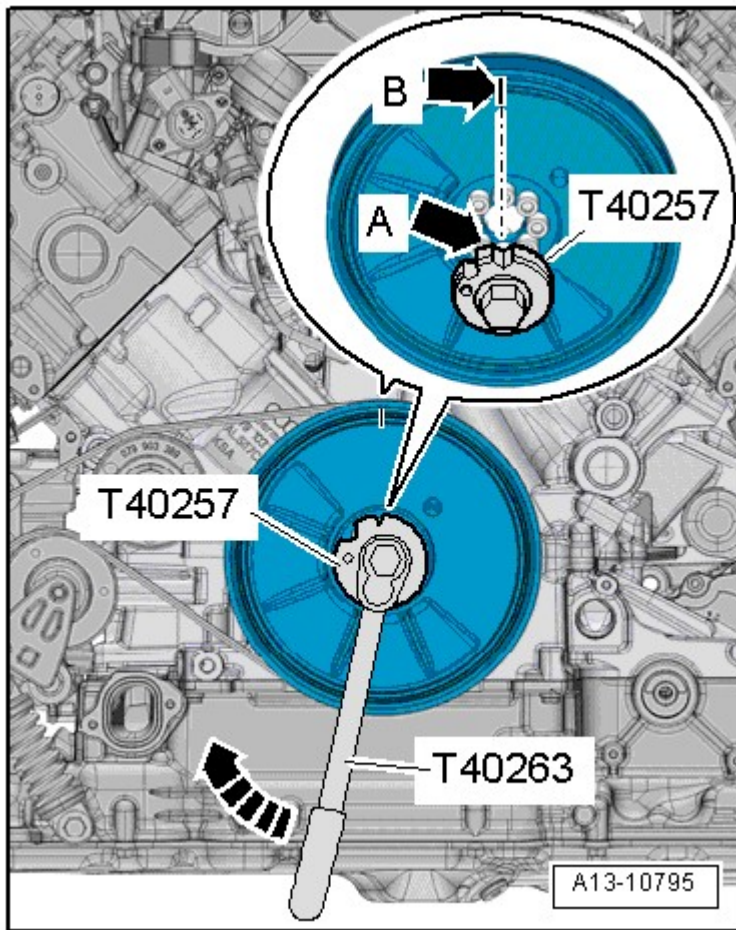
Turning Crankshaft 180° In Direction Of Engine Rotation -Arrow
